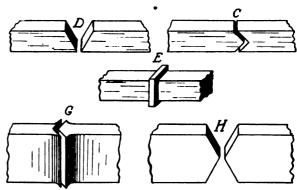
VARIOUS METHODS OF PREPARING JOINTS TO BE WELDED.
